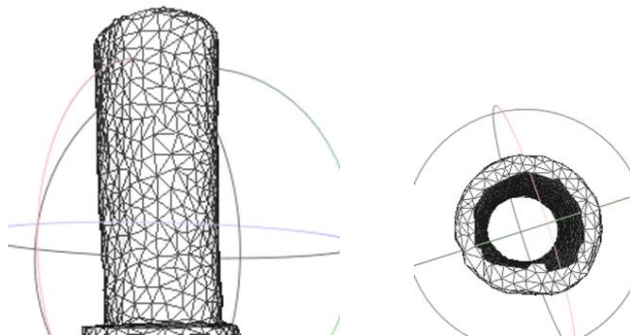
Result of a cylinder scanning (3100 faces); frontal view (left) and top view (right)
